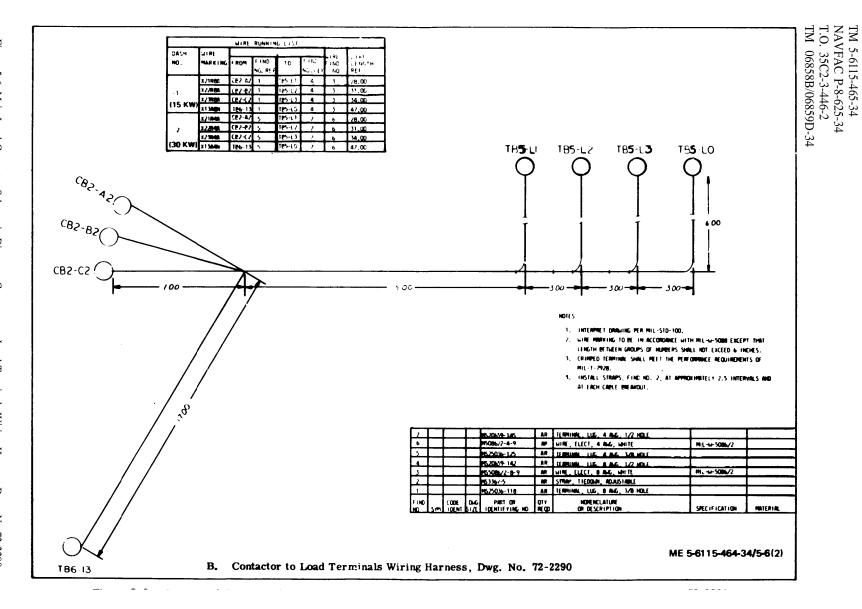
Main Load Contactor Schematic Diagram, Contactor to Load Terminals Wiring Harness, Dwg. No 72-2290, and Contactor to Reconnection Board Wiring Harness, Dwg. No. 72-2225 (Sheet 2 of 3)
